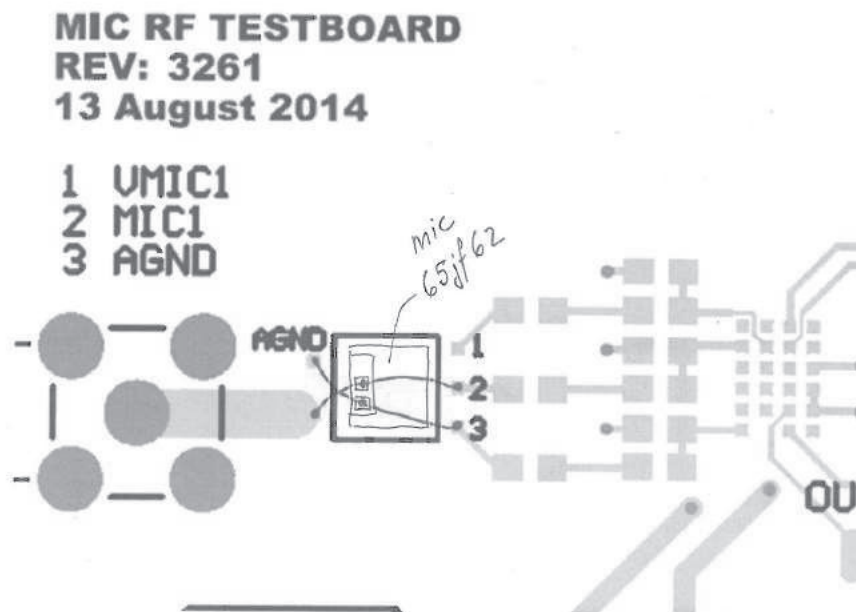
PCB layout showing the microphone test board connections on a PCB.
